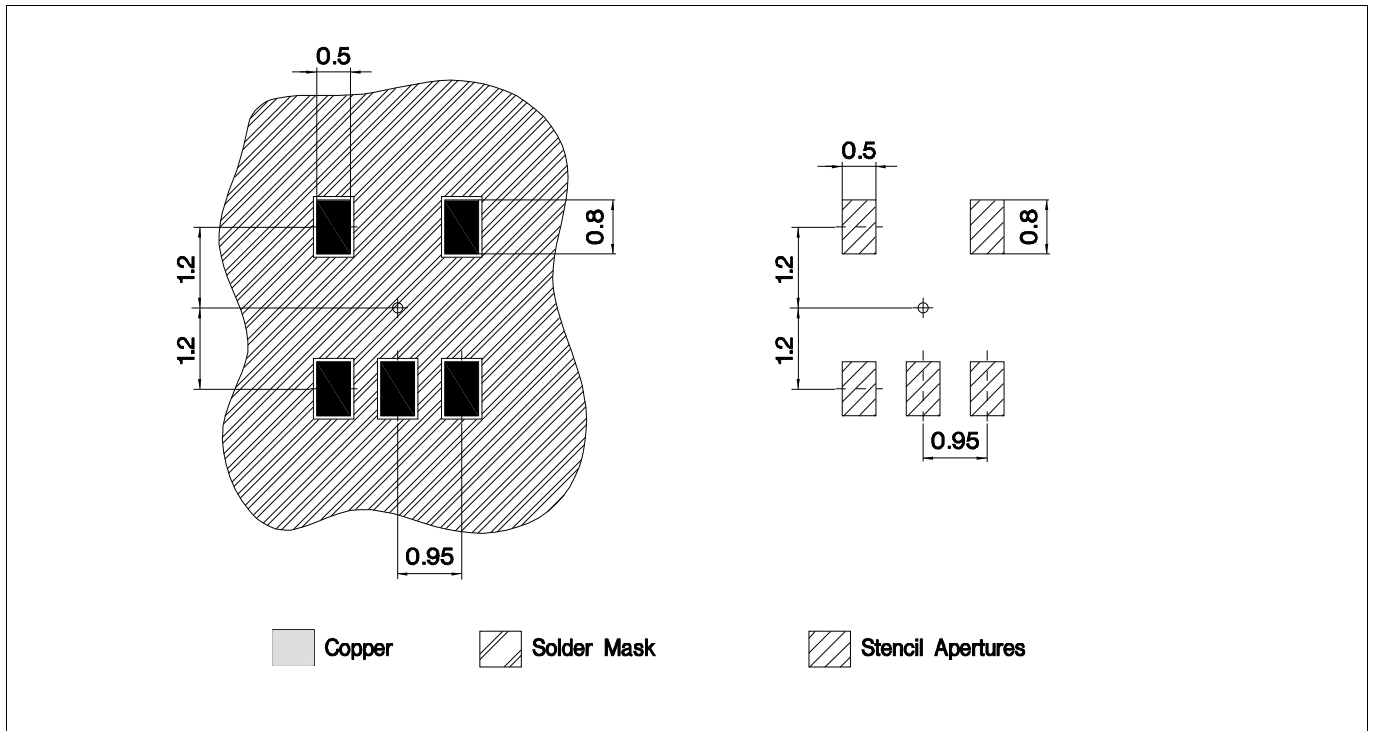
PG-SOT23-5-1 Footprint Dimensions
